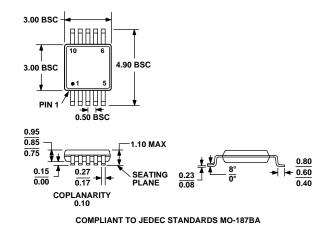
10-Lead Mini Small Outline Package [MSOP] (RM-10) Dimensions shown in millimeters
